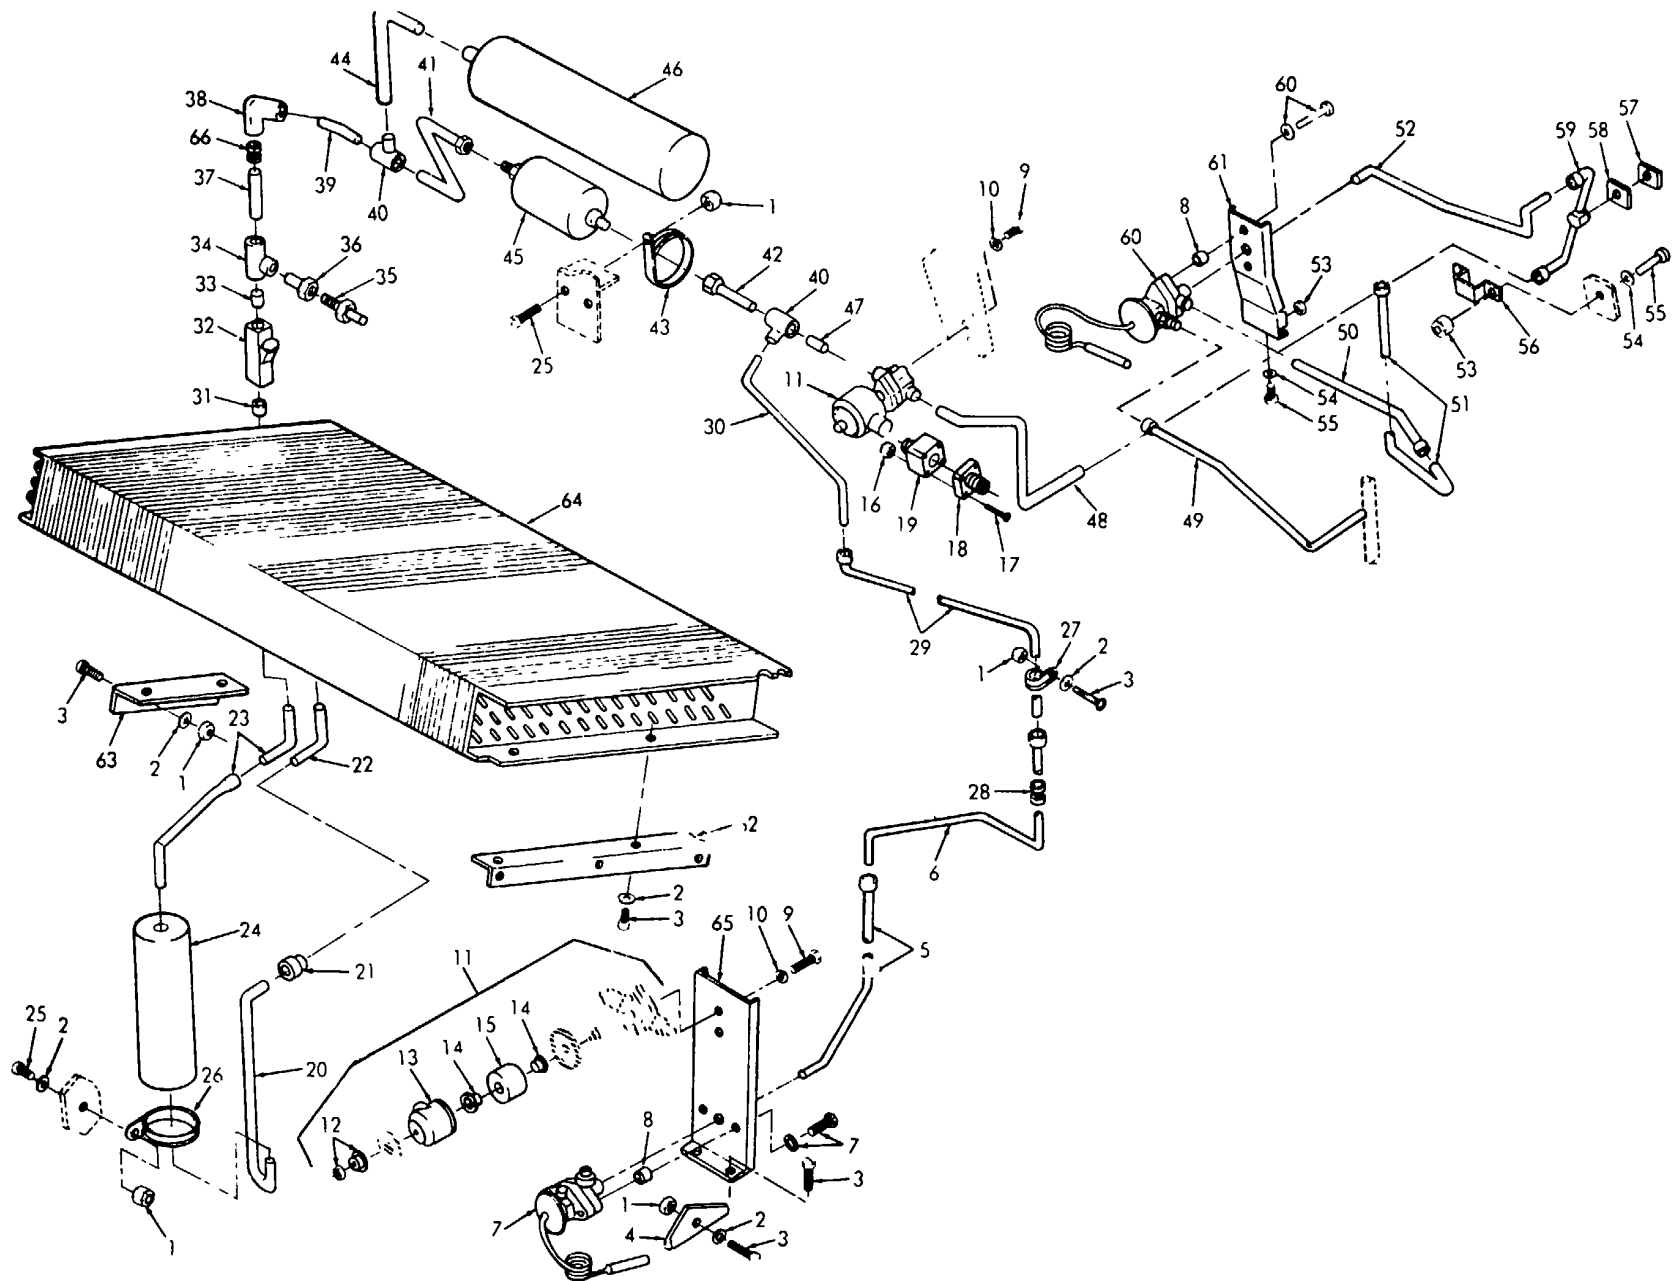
Condenser, De or, Receiver, Valves, Tubes and Fittings
